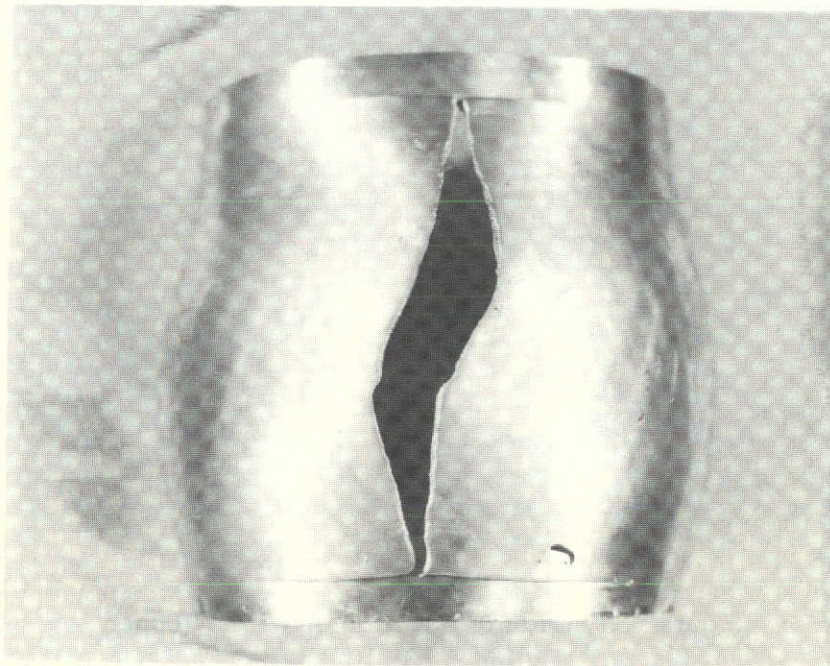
Fracture Surface of Wire Wrapped Cylinder No. 13
